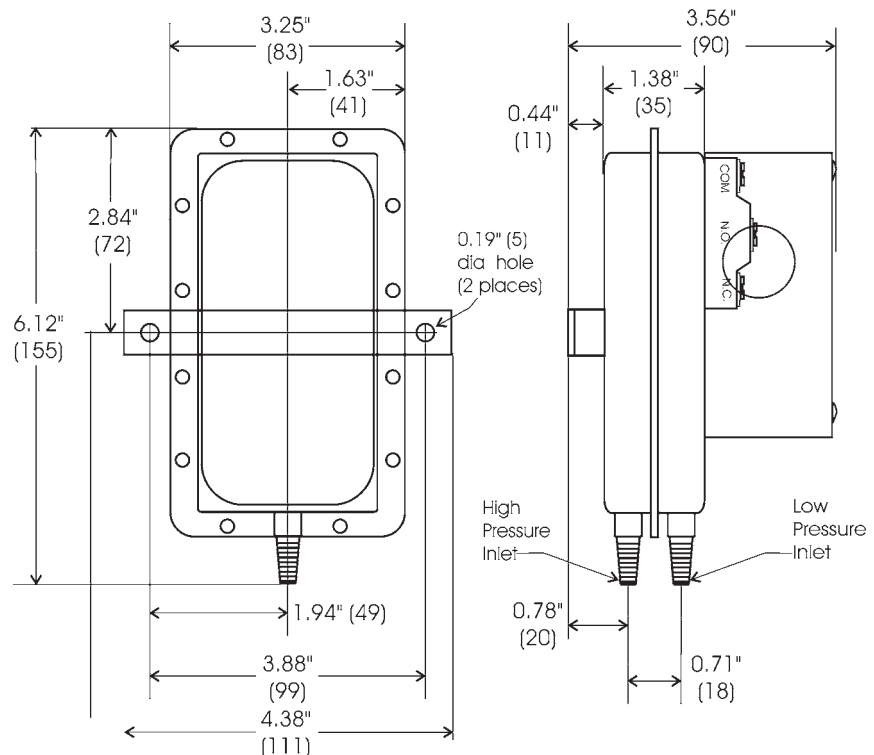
(Dimensions): Typical ANA Configuration, with strap mounting bracket, barbed air sample line connectors, screw terminals and enclosure cover.
